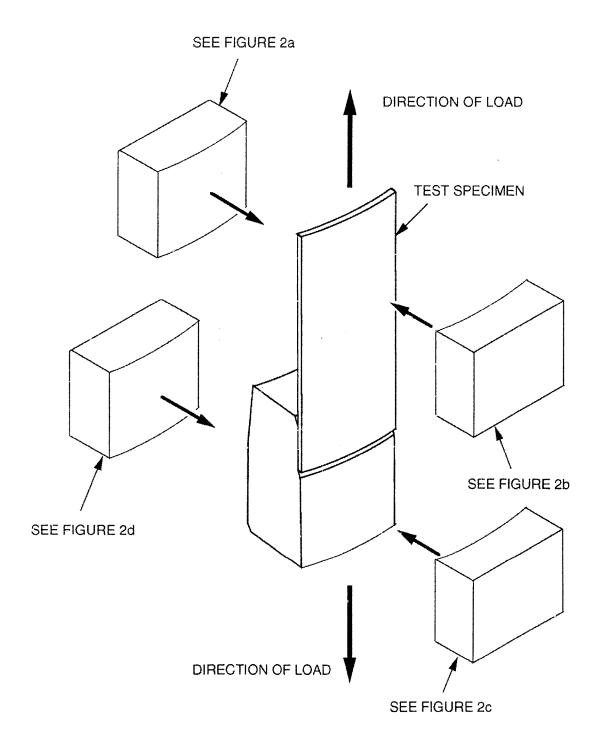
Arrangement of inspection fixture components relative to butt weld specimen.
